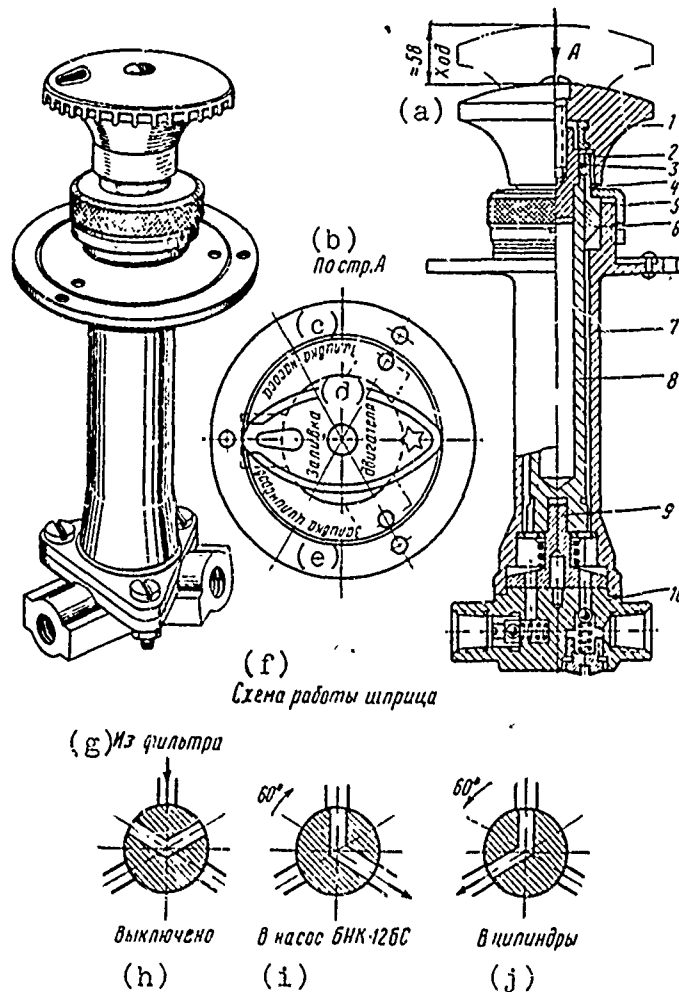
The priming pump of the engine (injector): 1 - handle; 2 - sleeve; 3 - spring; 4 - support sleeve; 5 - nut; 6 - packing (stuffing box); 7 - pump housing; 8 - piston (plunger); 9 - slide valve; 10 - head with check valves.
